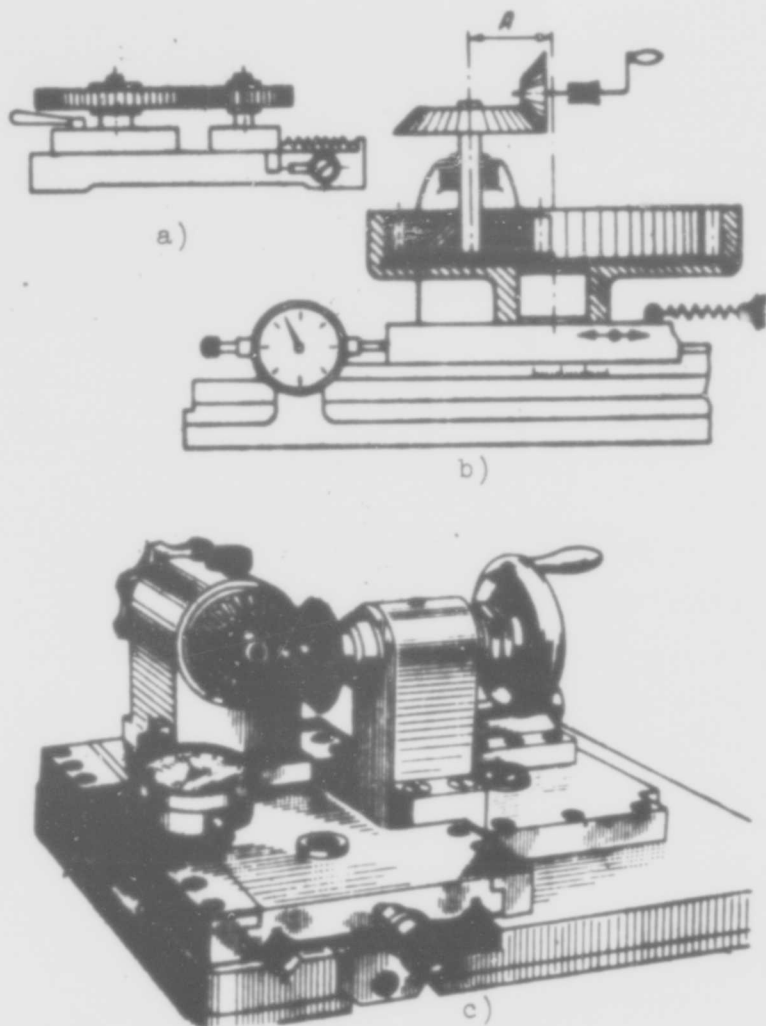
Combined check of gears. a) external spur gears; b) internal spur gears; c) bevel gears.
